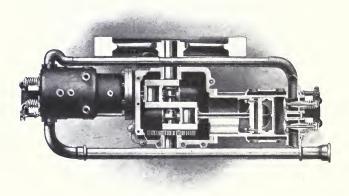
Section of Two-Cylinder Engine Permitting of Access to Valves through Spark-Plug Hole.
